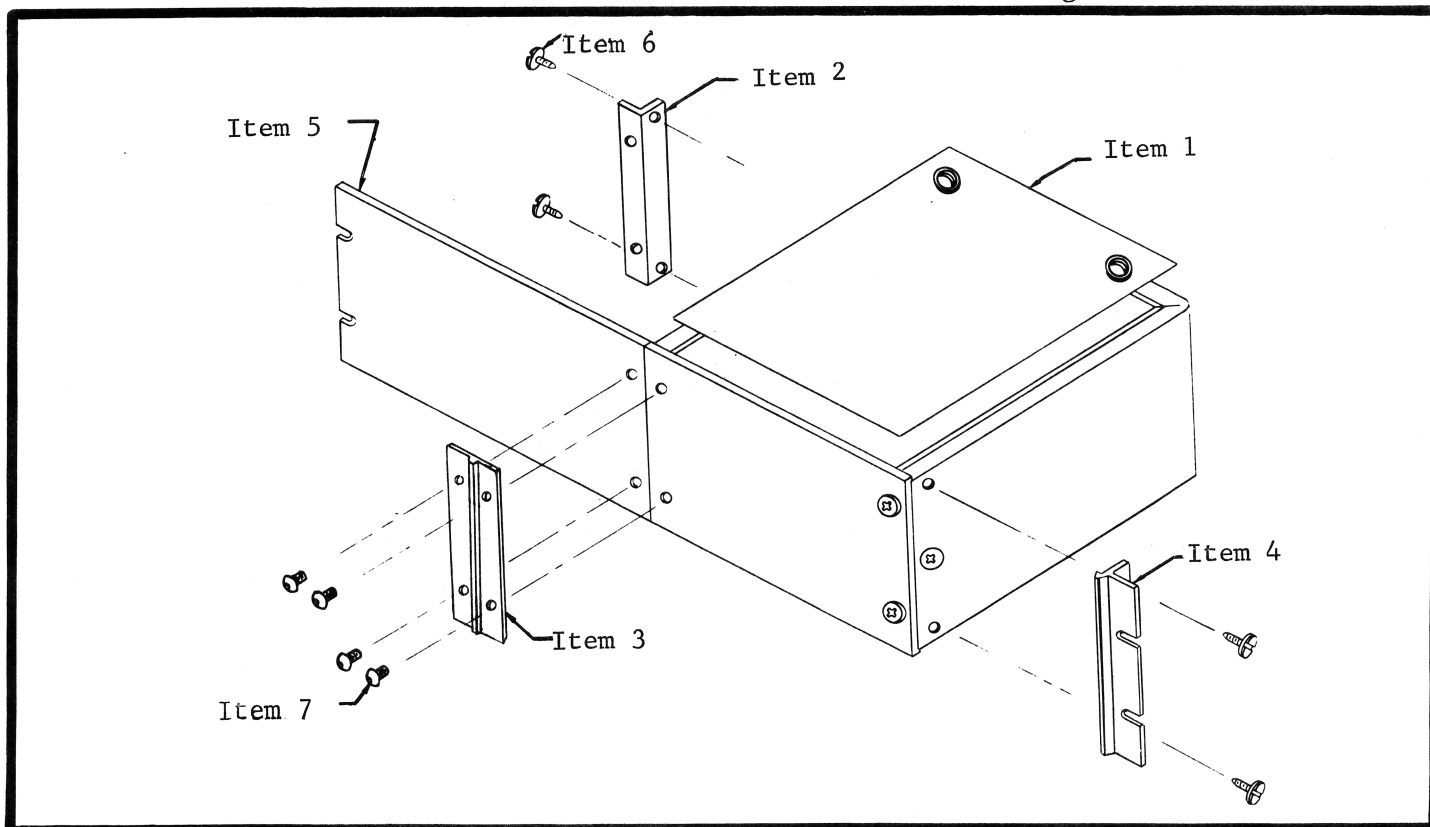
Exploded View of Model 4003A Rack Mounting Kit. Refer to Table 7 for parts list.
